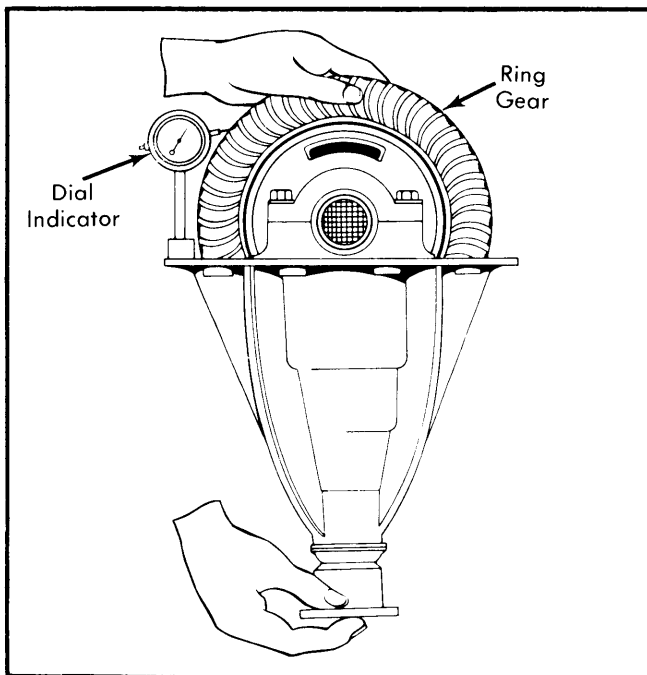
Checking Ring Gear-to-Drive Pinion Gear Backlash
